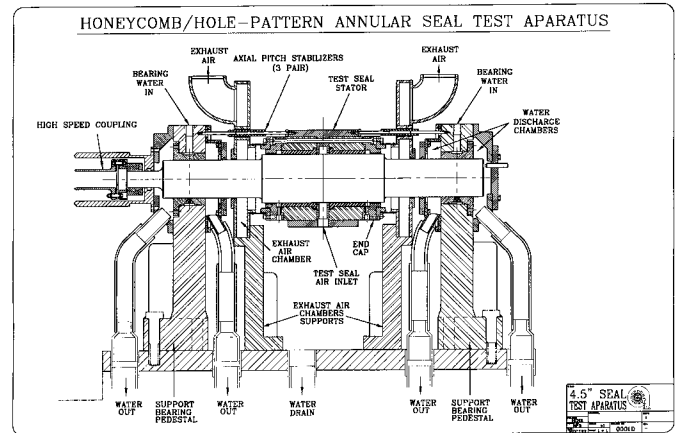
TAMU Turbomachinery Lab Air Seal Test Rig
